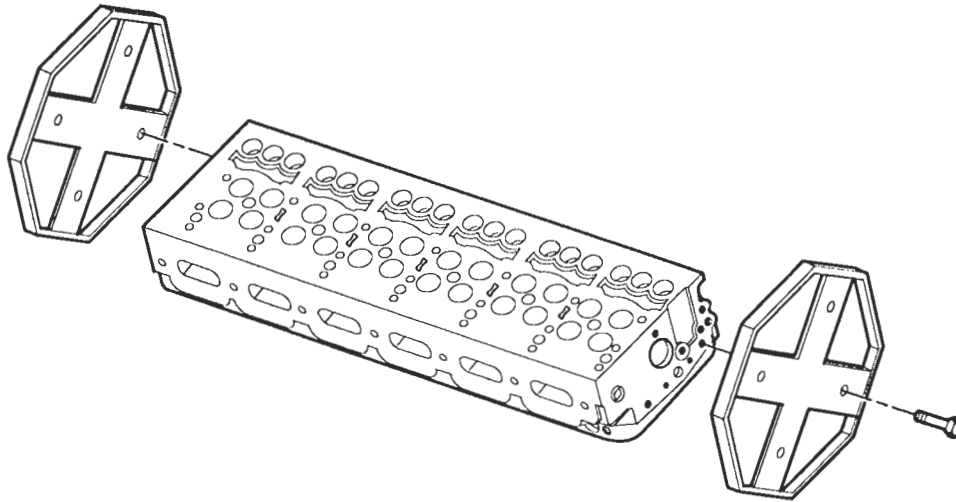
Cylinder Head Mounted on Holding Plates (J 3087-01)
